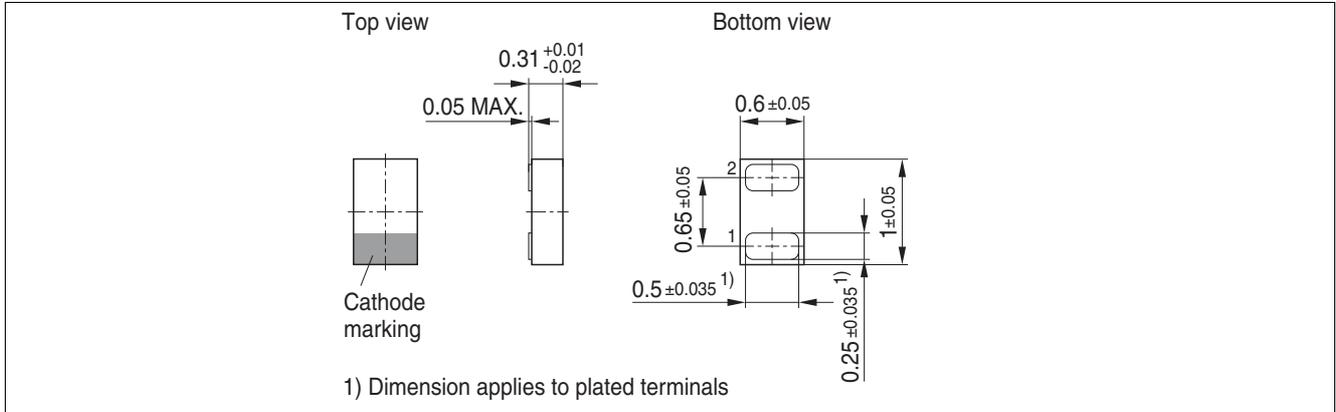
TSLP-2-19: Package outline (dimension in mm)
